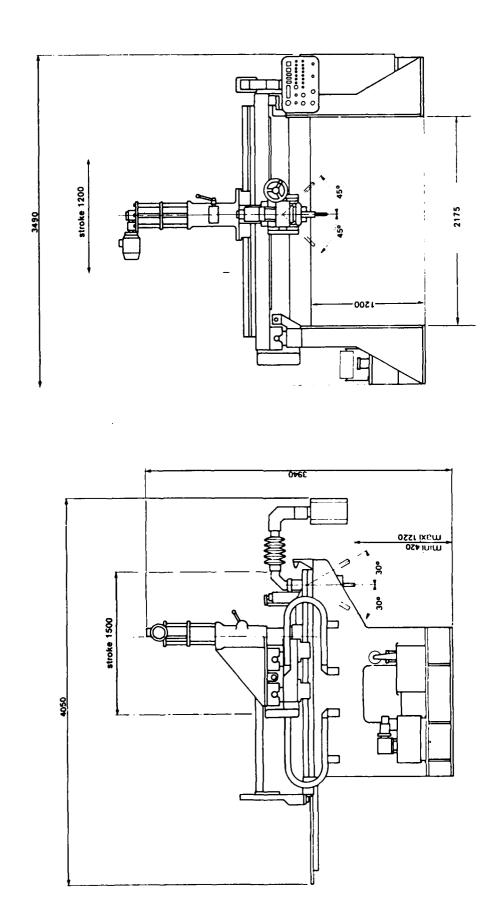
Seva "Fixed Parts" Machine Dimensions 102
